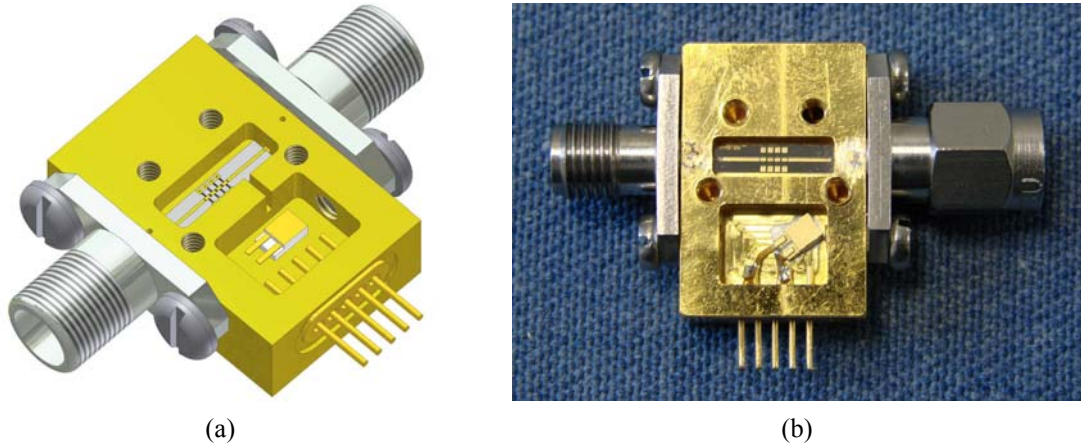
Attenuator module with cover removed; (a) design and (b) final assembly. Dimensions are $20.5 \times 13.6 \times 7.7 \text{ mm}^3$, excluding connectors.
